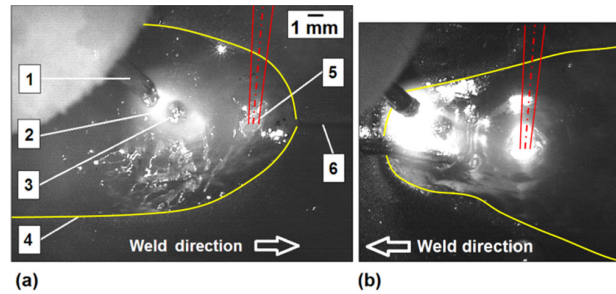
HSI of laser-MAG hybrid welding for (a) trailing torch arrangement and (b) leading torch arrangement where: 1 – filler wire, 2 – arc plasma, 3 – molten droplet, 4 – liquid weld pool rim, 5 – laser keyhole, 6 – air gap between plates.
